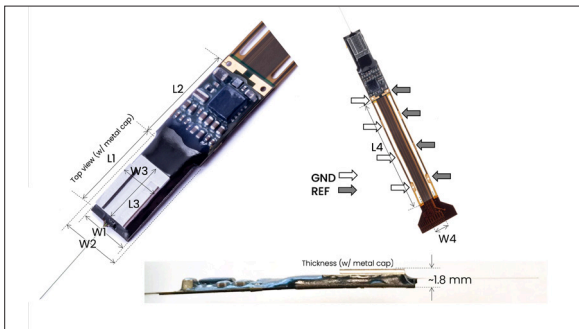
Dimensions of the different probe packages and locations of REF/GND input pads.
